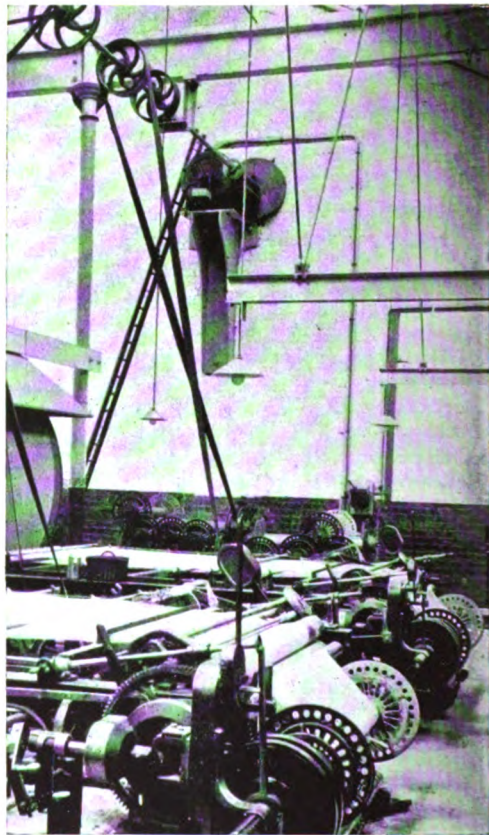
15 H.P. MOTOR DRIVING SIZING MACHINE.
